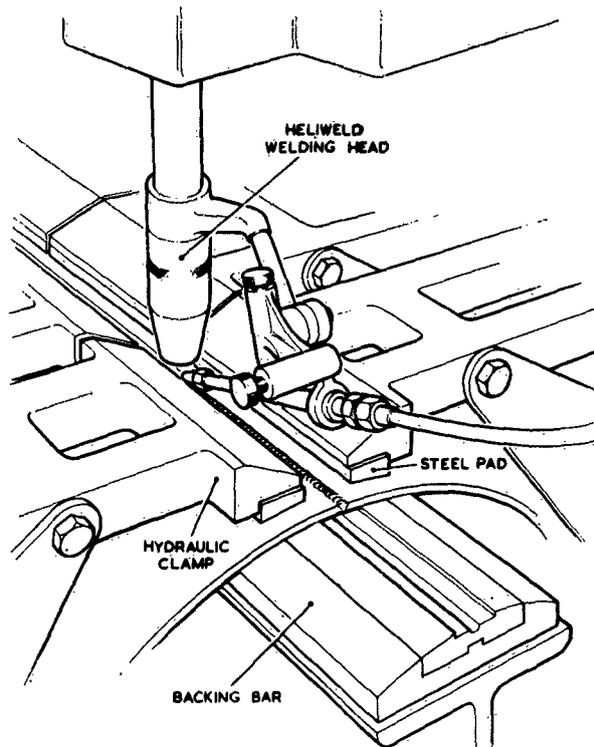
Clamping fixture to facilitate longitudinal welding
